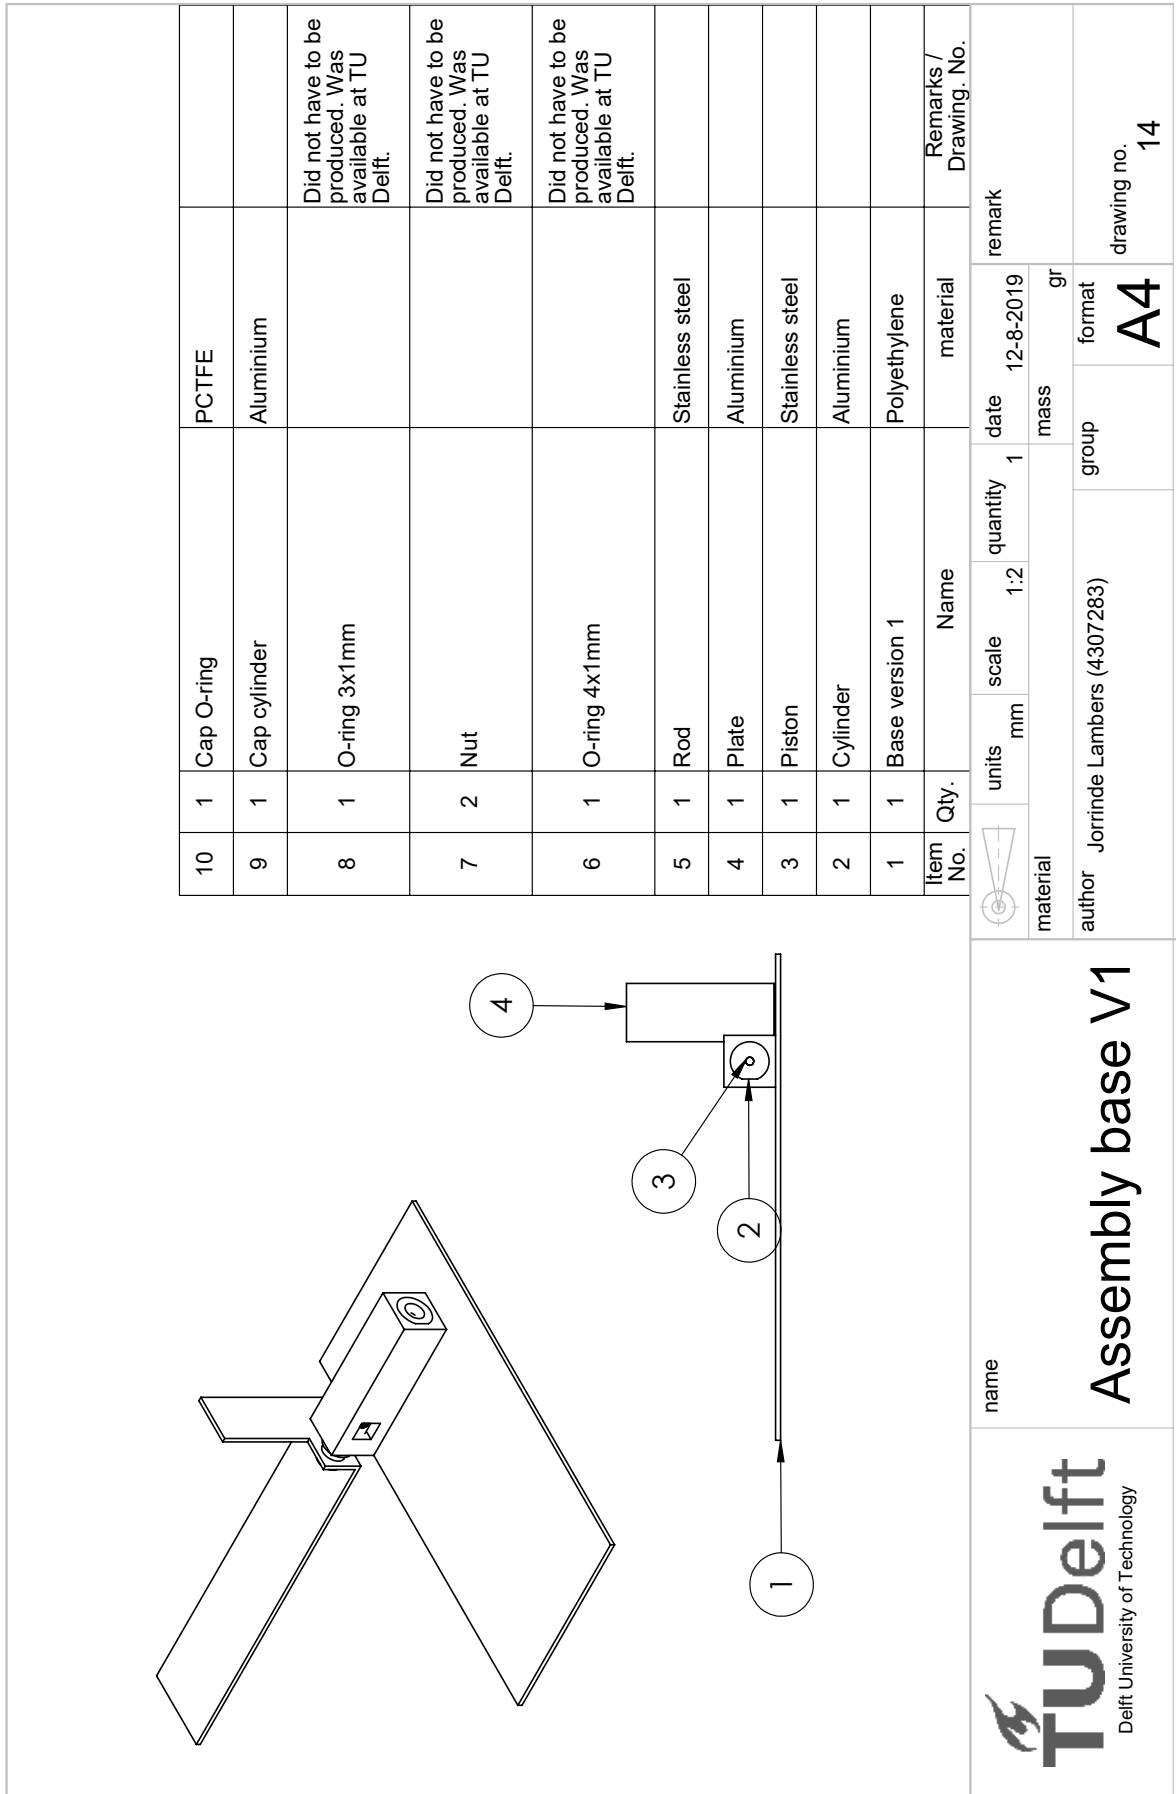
SolidWorks drawing of the total assembly with base version 1.
